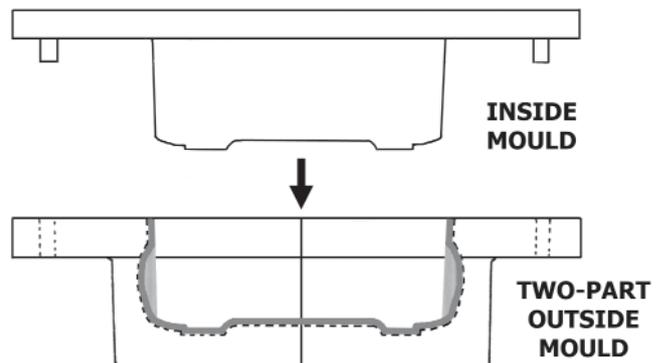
Making a bellied bowl. During casting, pewter fills the light and dark grey zones. The light grey zone, which is only 2-3mm thick, is then removed on a lathe.
